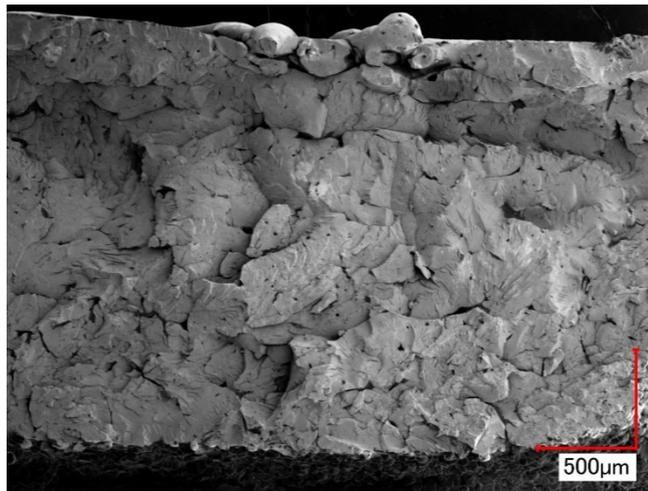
Fracture surface of the part obtained with tophat profile laser
